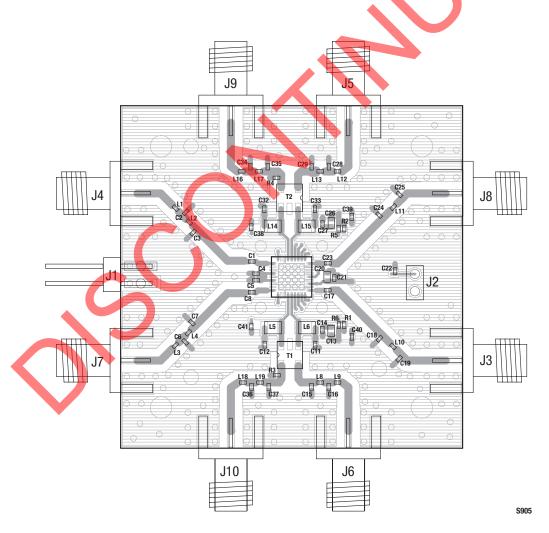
SKY73022-11 Evaluation Board Assembly Diagram
